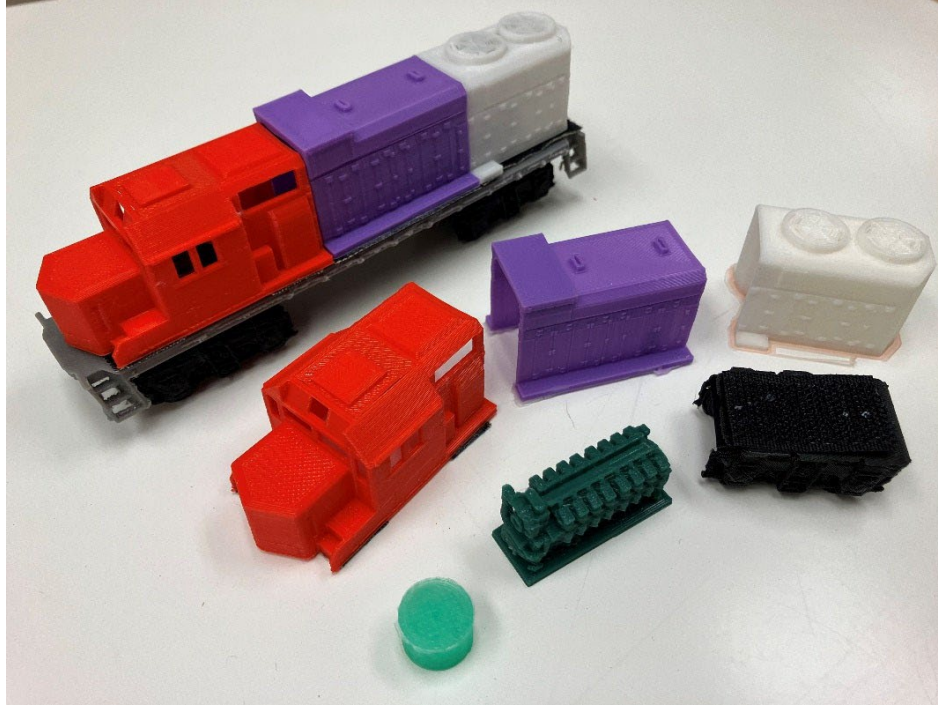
3D Printed Locomotive Puzzle Breakdown Model
